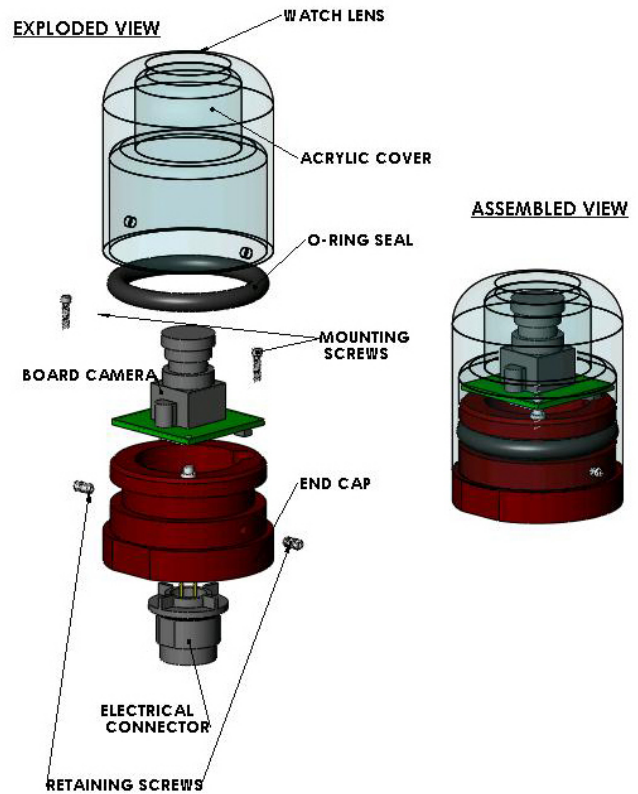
SOLIDWORKS EXPLODED VIEW OF CAMERA ASSEMBLY
